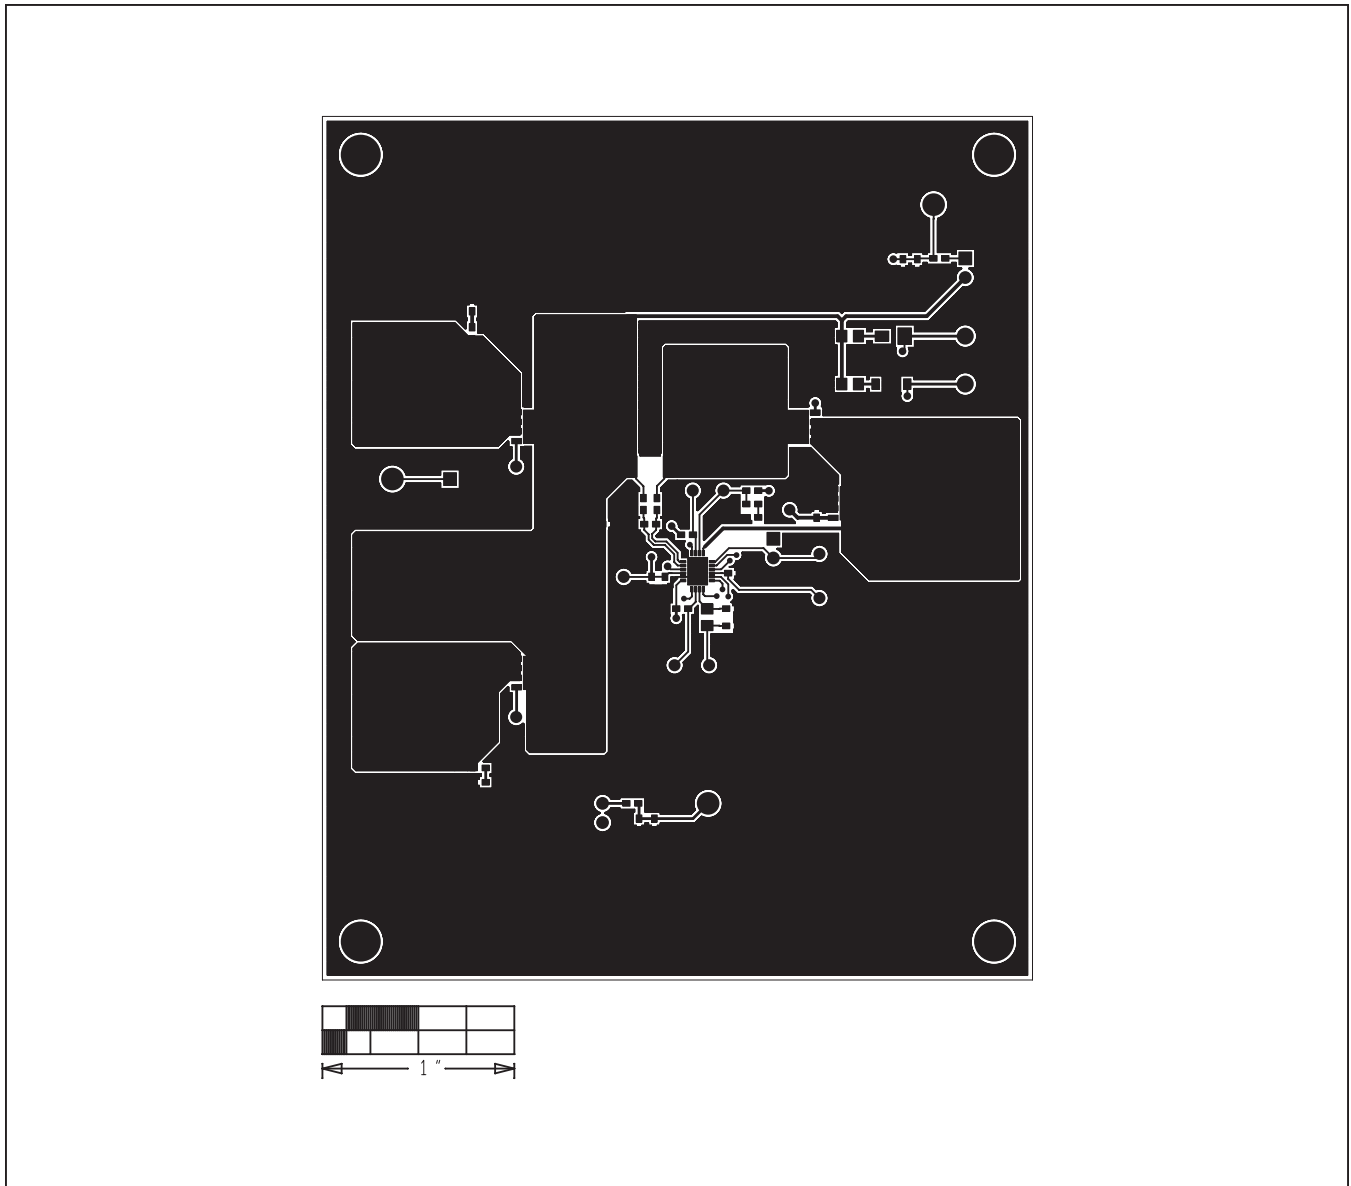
MAX15068 EV Kit PCB Layout—Component Side
